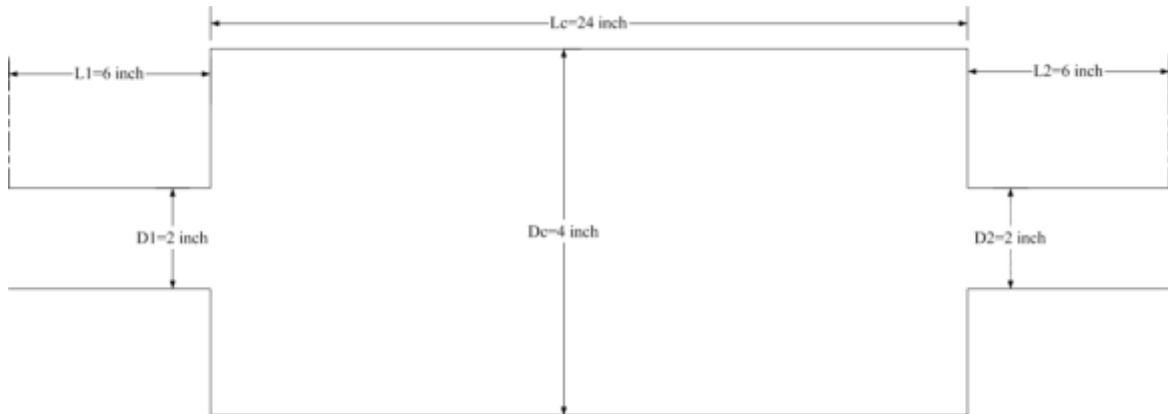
Geometrical parameter of single inlet single outlet expansion chamber
